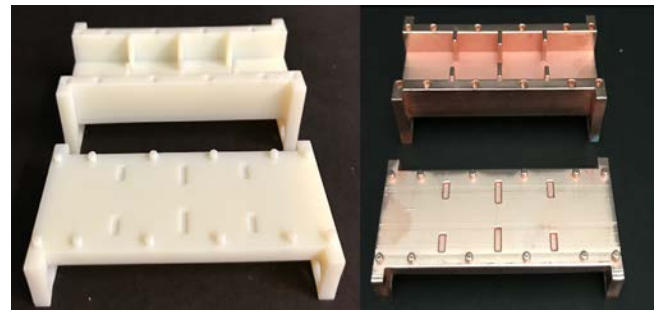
The fabricated iris filter (a) before and (b) after metal coating.
